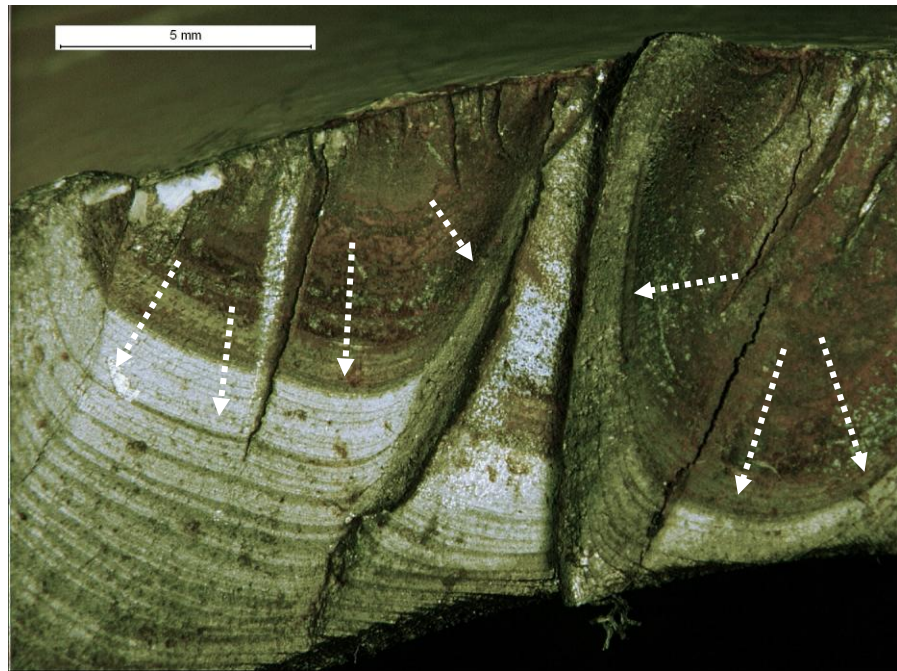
Beach lines on the fracture surface near to the starting point. The local direction of crack growth is marked.
